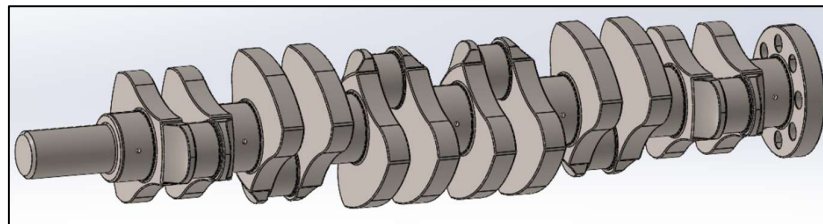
3D CAD Model of the Six-Cylinder Heavy-Duty Crankshaft
